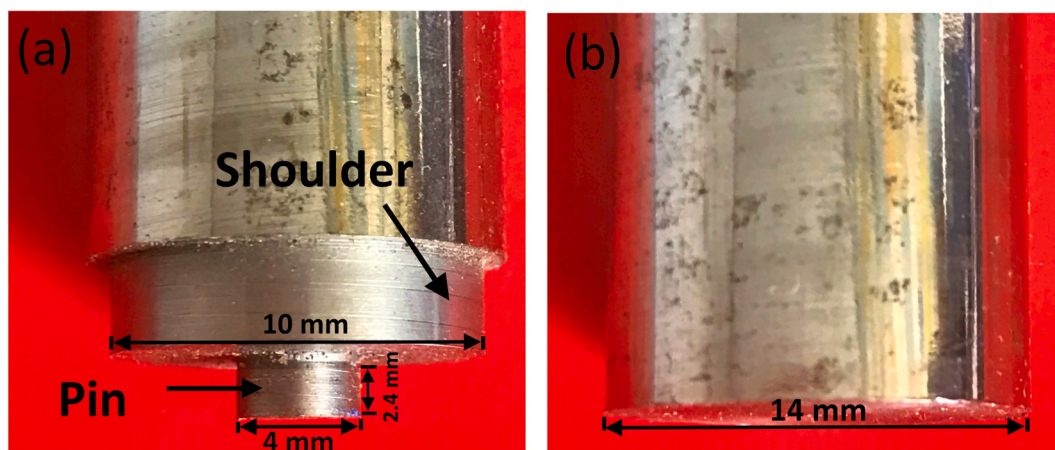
Tools used for the welding process (a) FSSW and 1st stage of MFSC process, (b) second stage of MFSC process [26].
